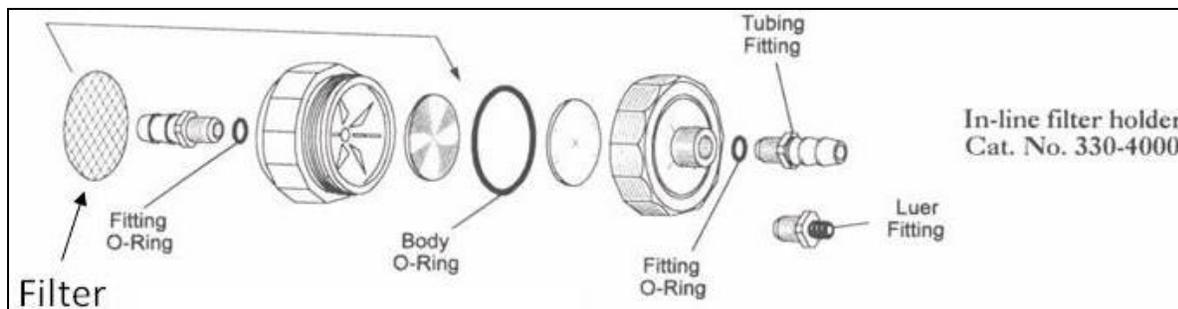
Diagram of inline filter holder (NALGENE<sup>®</sup>) showing assembly. In this configuration, the input is on the right (use the Luer fitting) and the outflow is on the left.
